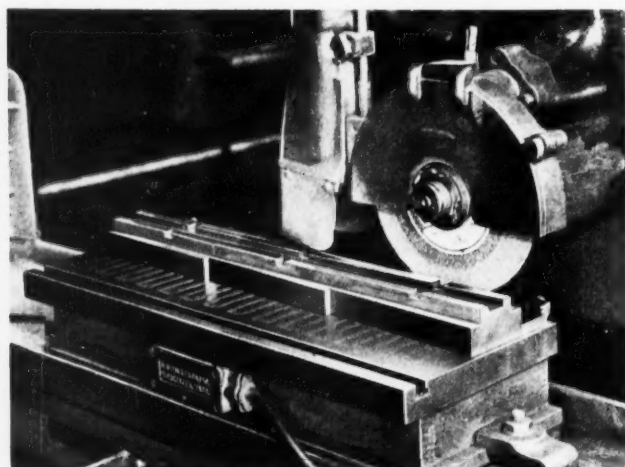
Grinding Two Surfaces that Must be Closely Parallel on Guides for Die Slides. Three Pieces are Ground at Once
